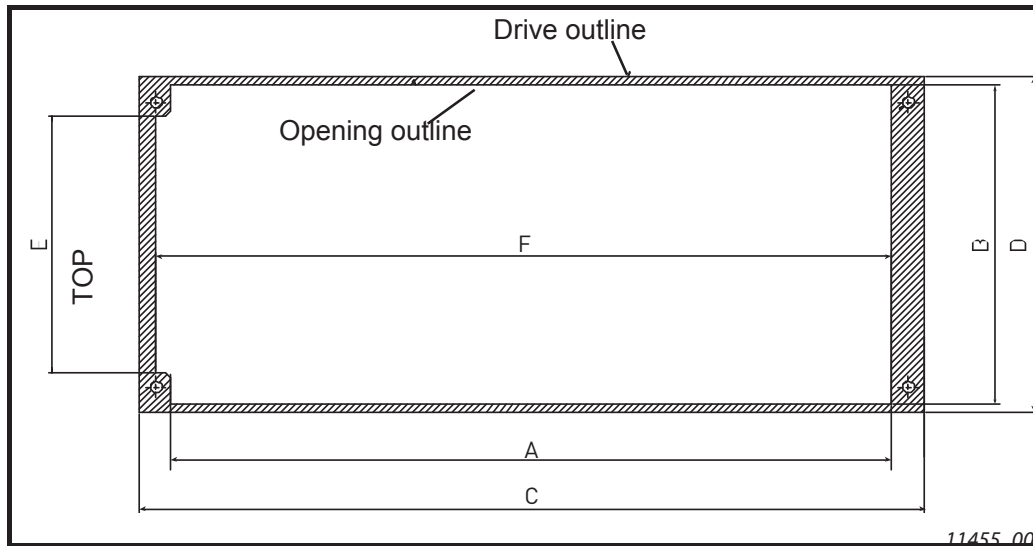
Flange mount cutout dimensions for MR4 to MR6
